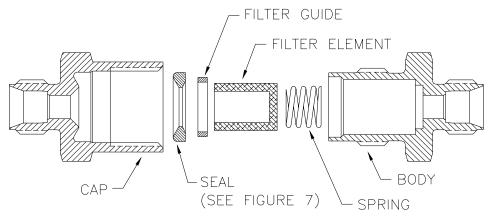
Inline Filter with Sintered Element Exploded View purchased after July 1, 1993
